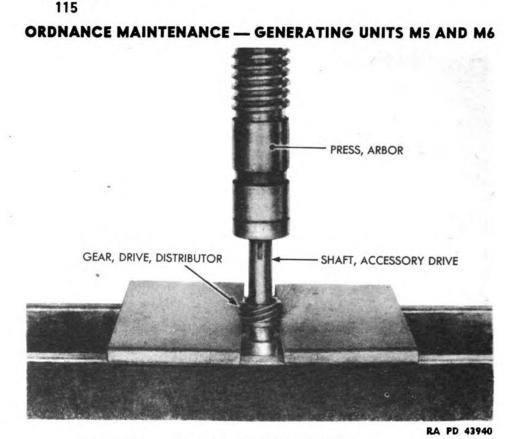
Pressing Distributor Drive Gear from Accessory Drive Shaft
